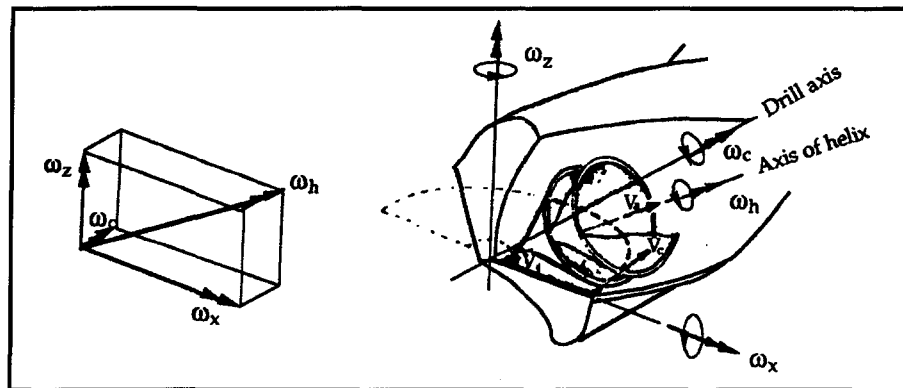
Conical helical chip produced by the twisted part of the cutting lip.¹⁶²
